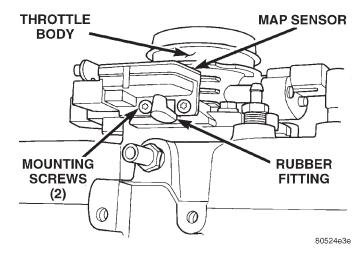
MAP Sensor Mounting—4.0L Engine REMOVAL
